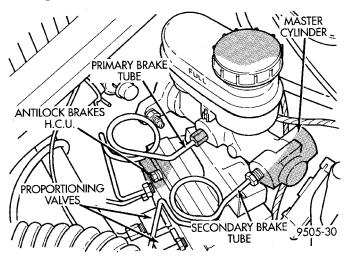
ABS Master Cylinder Primary And Secondary Ports
